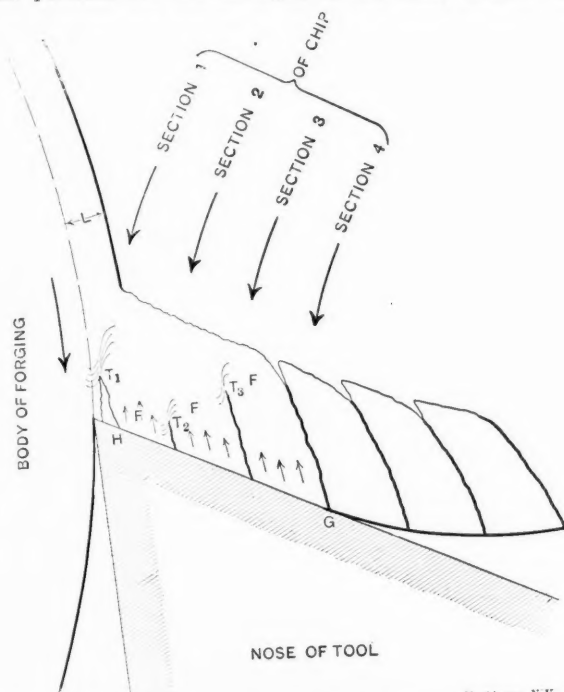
Showing how Chip is Partly Torn and Partly Sheared from Body of Forging.
